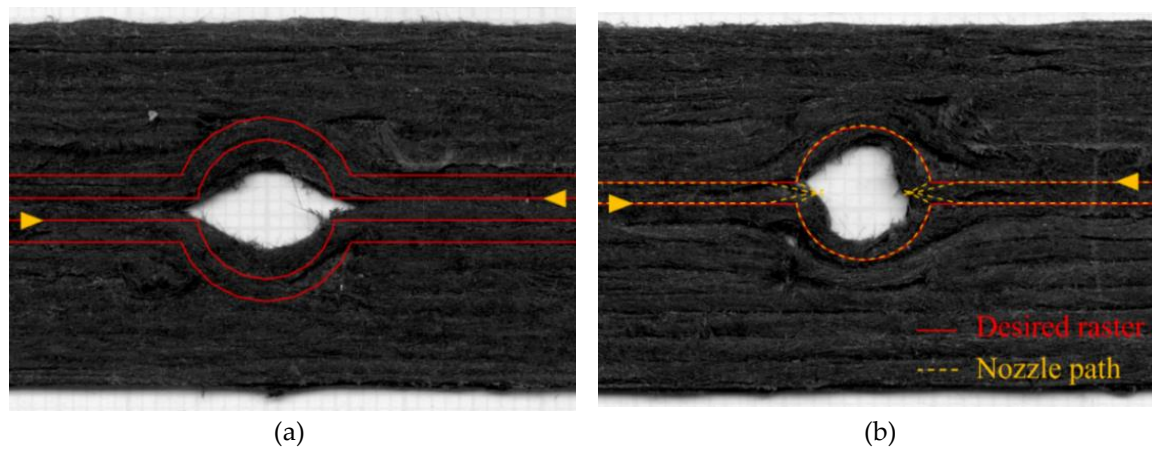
(a) Open hole printed part with normal curvilinear printing path; (b) open hole printed part with an empirical printing path modification (Chapter 5) by moving the nozzle further inwards.
